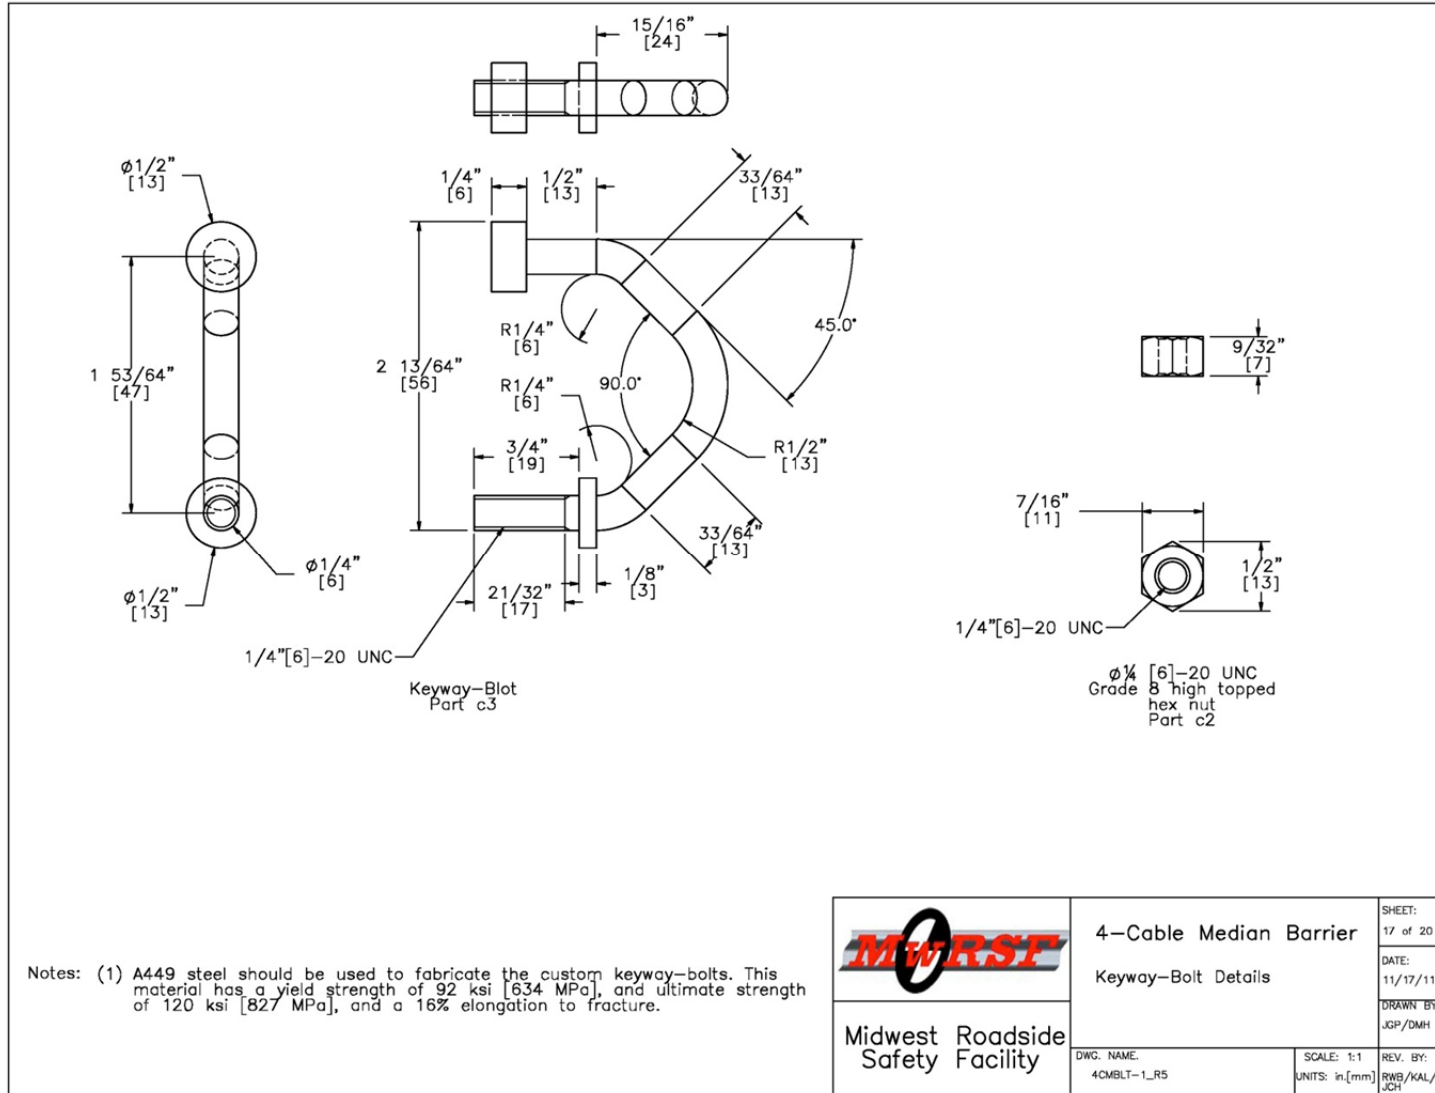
Keyway Bolt Detail, Test No. 4CMBLT-1
